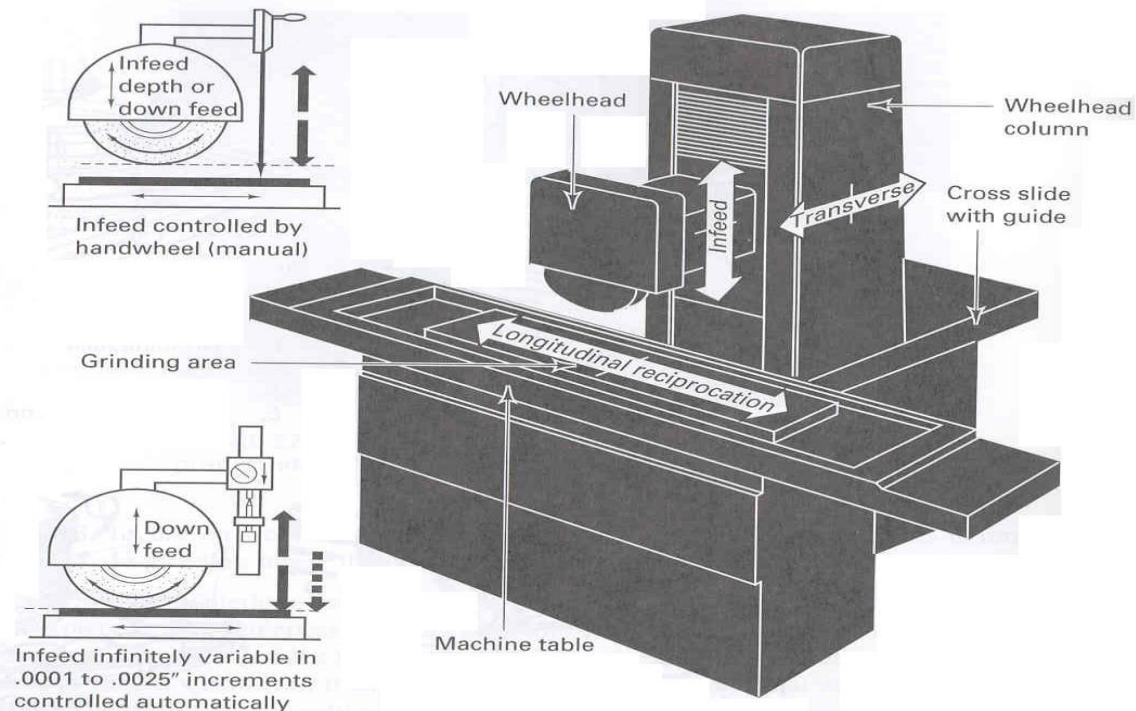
Horizontal spindle surface grinder, with insets showing movements of wheelhead.
